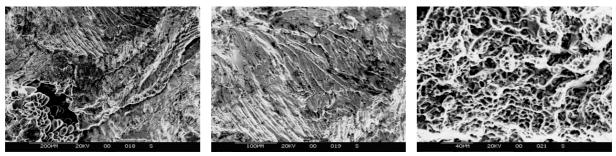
Fractography features on fatigue tested samples produced with sand casting process. The primer zone of the crack initiation (left), the propagation zone (centre) and the final ductile fracture zone (right).
